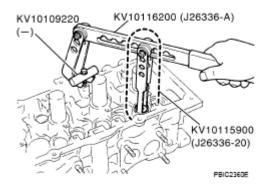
Installing Valve Collet With Valve Spring Compressor
